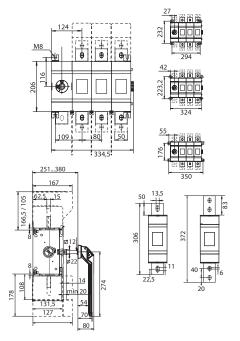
Overall and installation dimensions of 1000-1600 A 3P switch disconnectors
